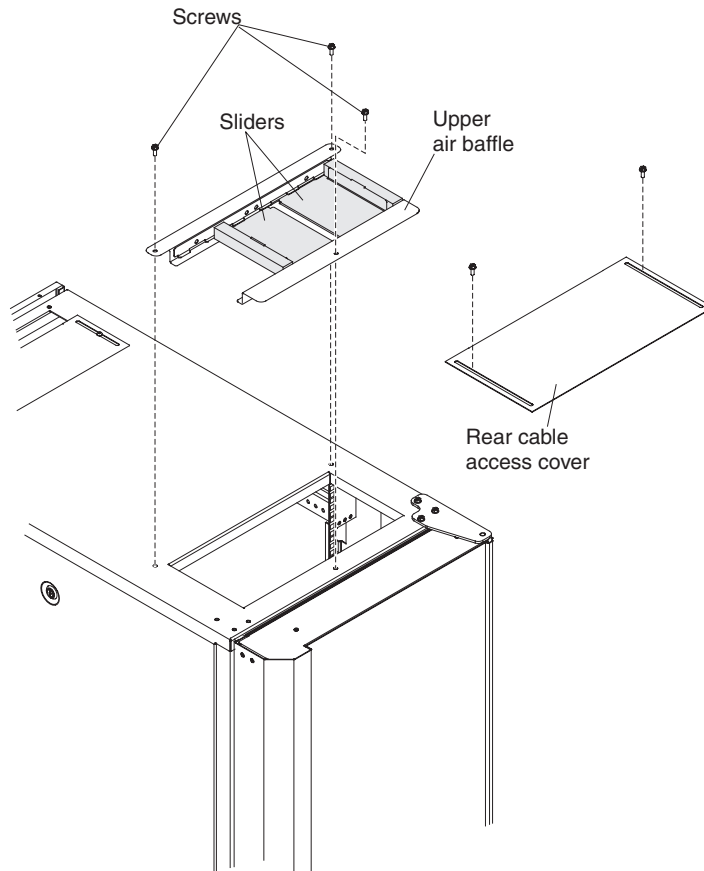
Removing the rear cable-access cover and installing the upper air baffle
